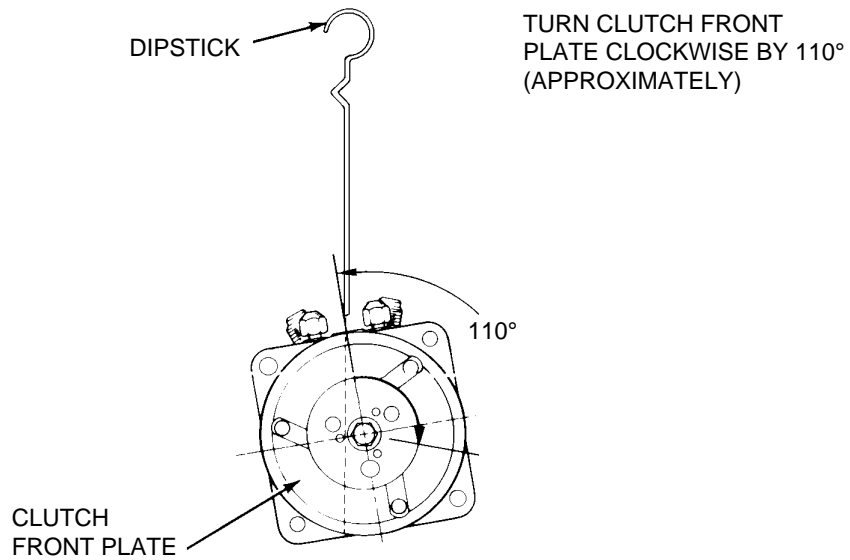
Rotation of Clutch Front Plate (Sankyo Compressor Oil Check)
